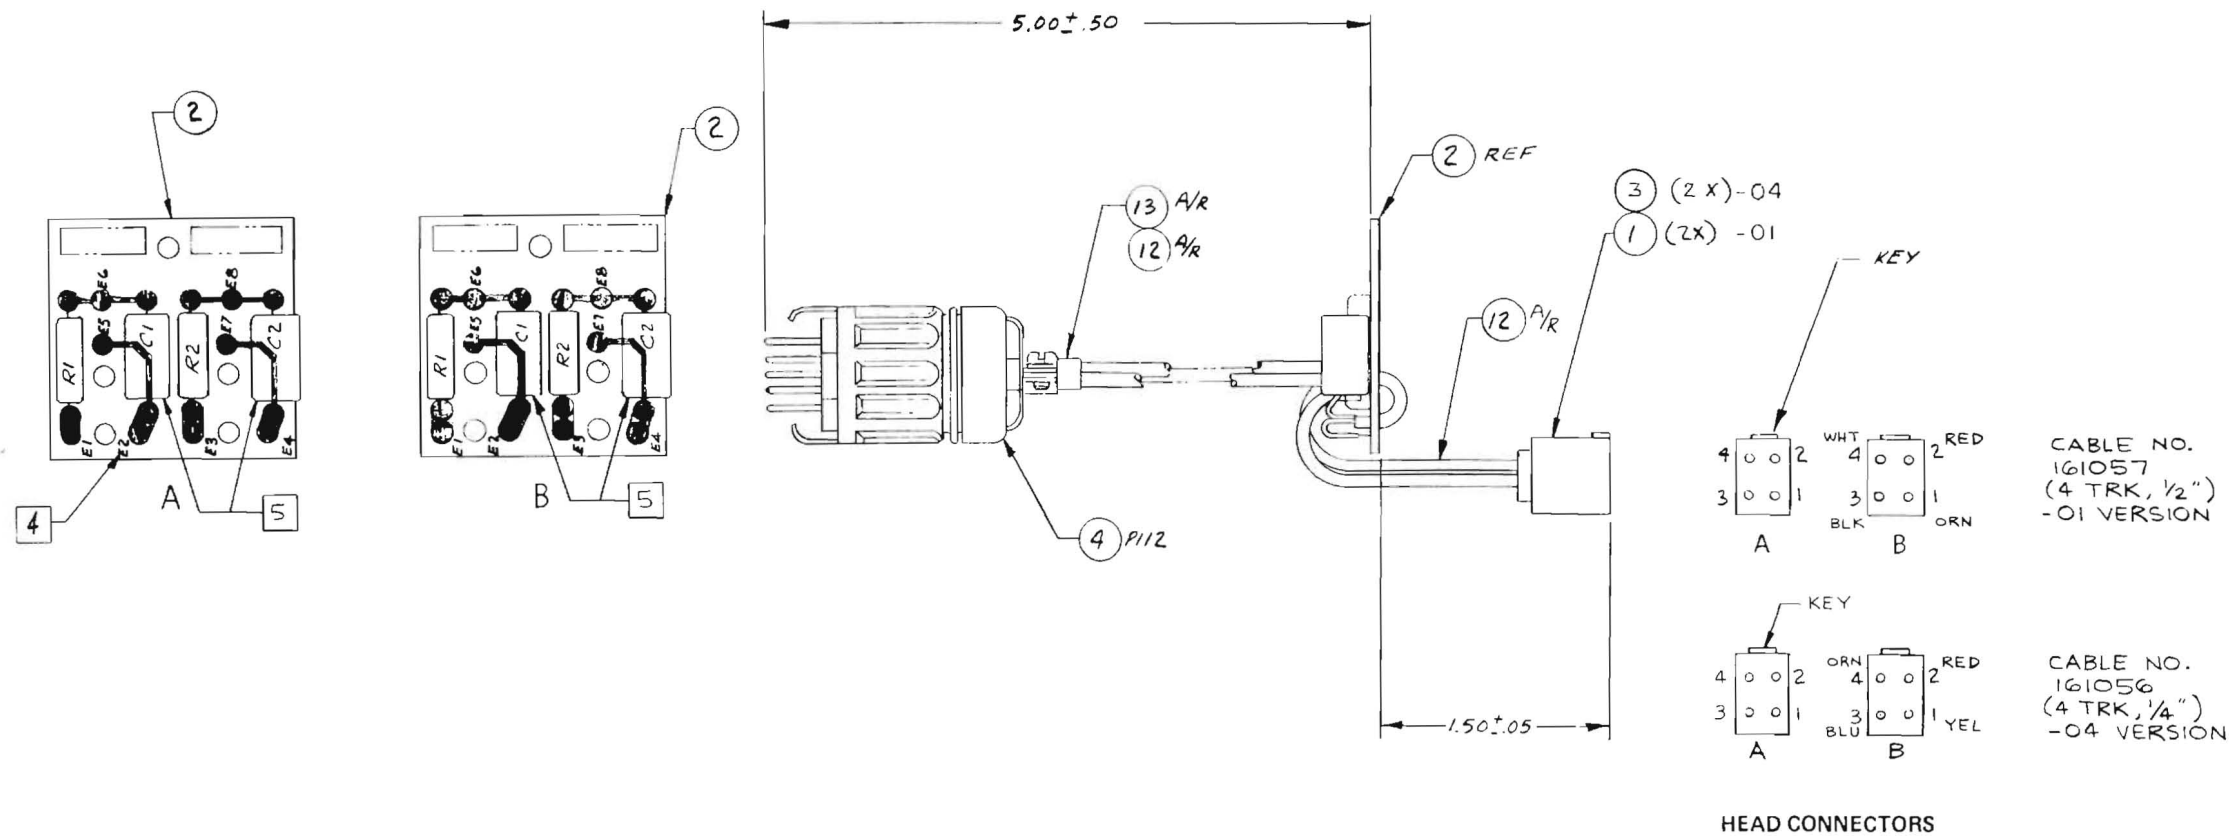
PWB and Erase Head Cable Assembly, Full-Track
